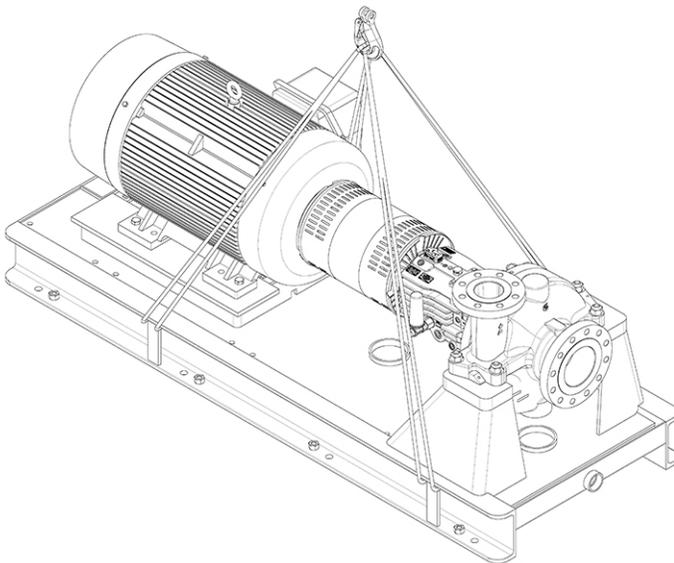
Example of a proper lifting method of pump on base plate with driver and motor
